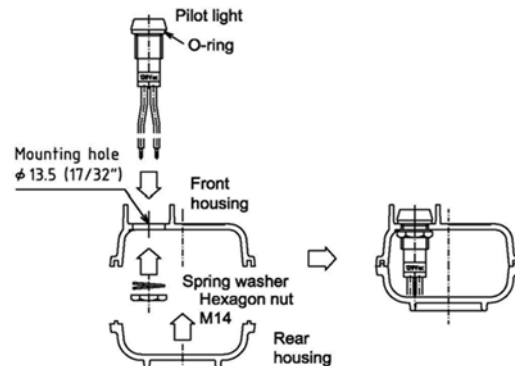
Cross-section view of Upper Left Position Mounting Hole Installation
